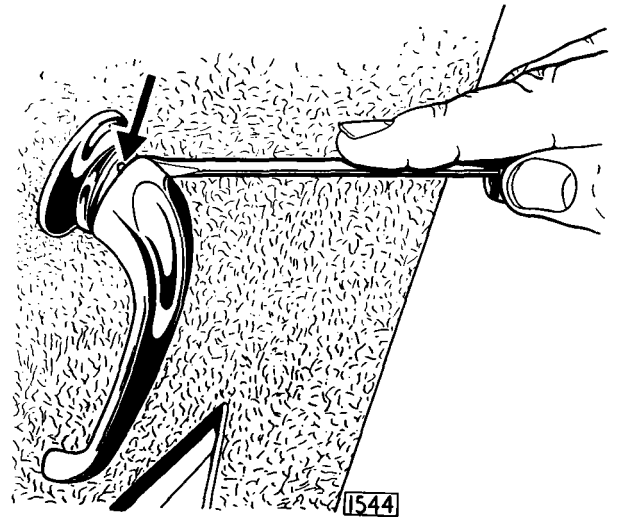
Showing the location of the interior door lock handle retaining pin.
